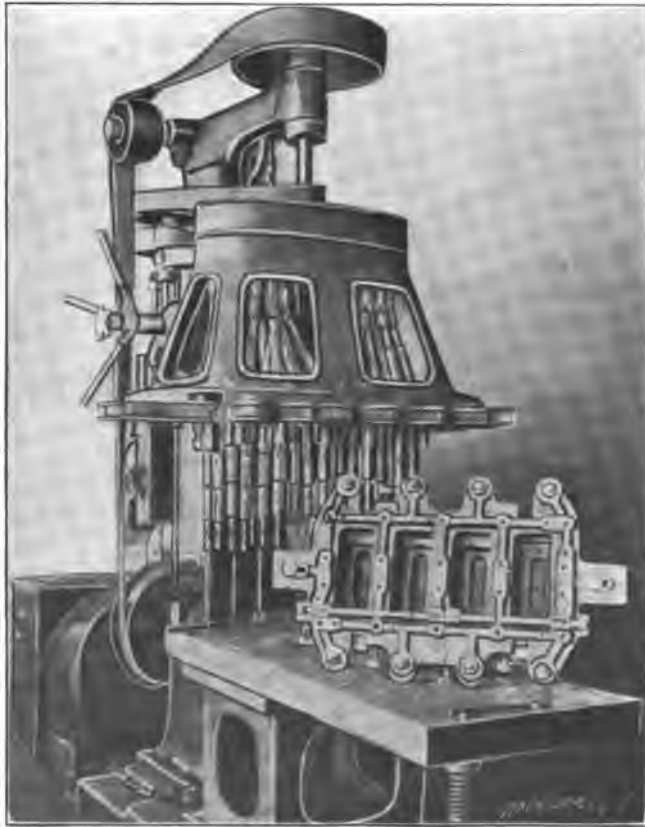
Twenty-four-spindle Machine for Drilling the Frames
